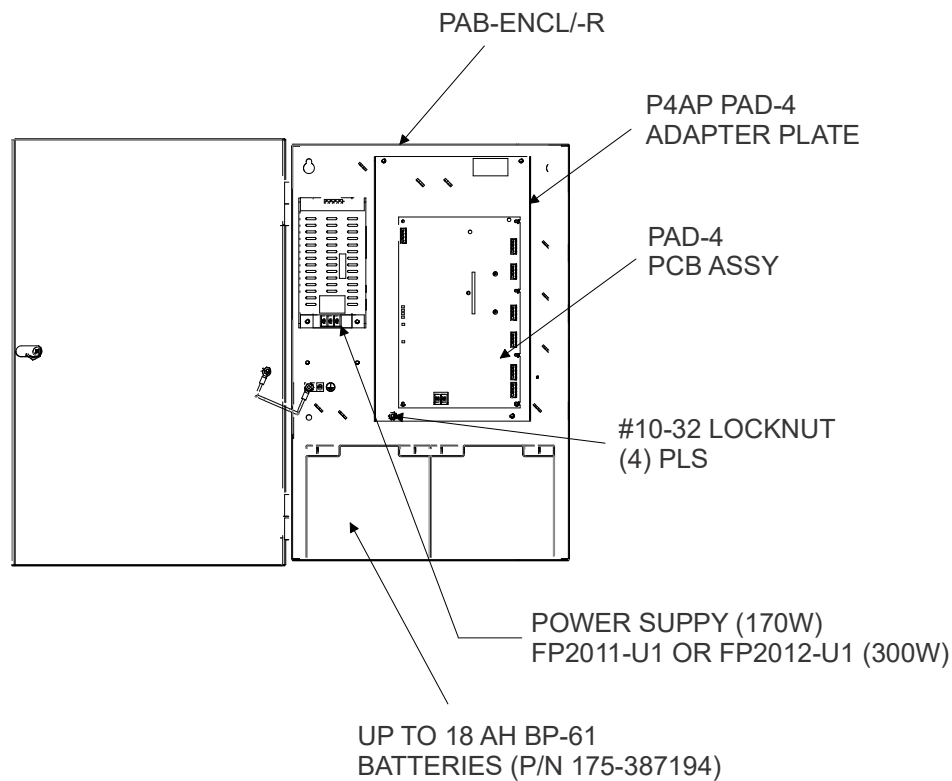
Mounting the Adapter Plate in a PAB Enclosure (Black & Red)
